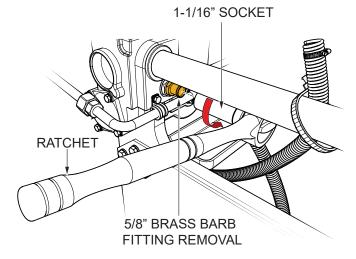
5/8" Brass Barb Fitting Removal Engine Block Side
